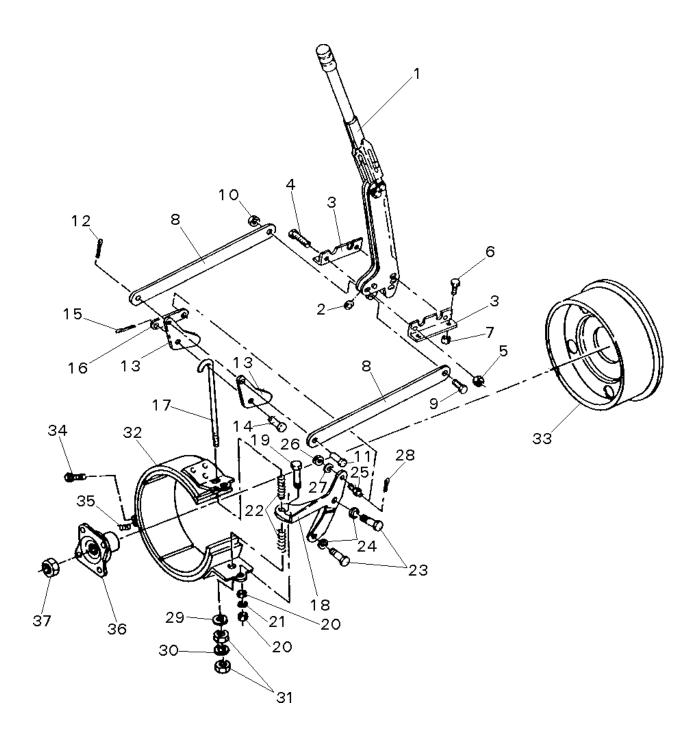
Park Brake Assembly, Serial Numbers 001 Through 361
